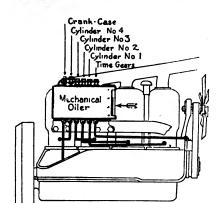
MECHANICAL OILER AND HOW THE OIL IS DISTRIBUTED
